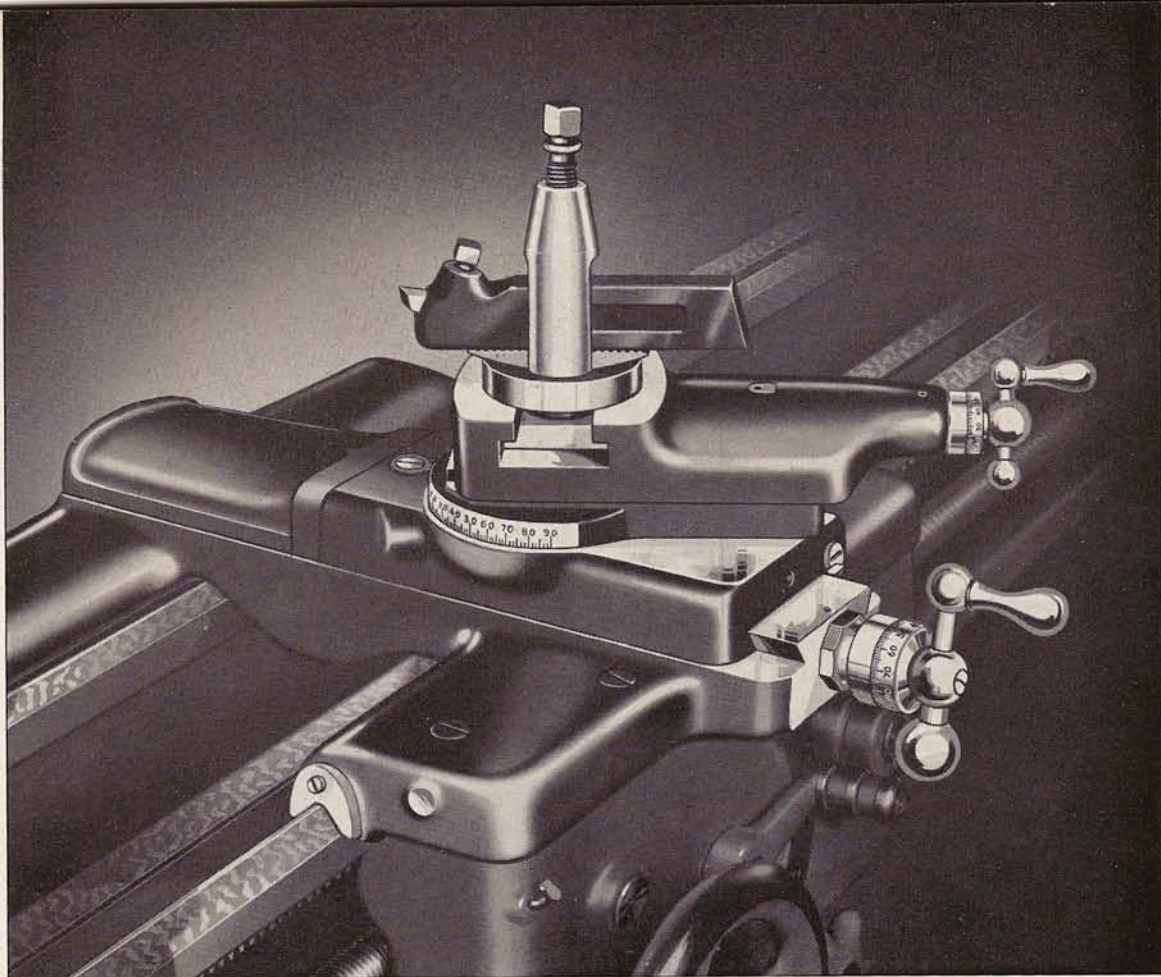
Improved Saddle and Compound Rest for South Bend Lathes
